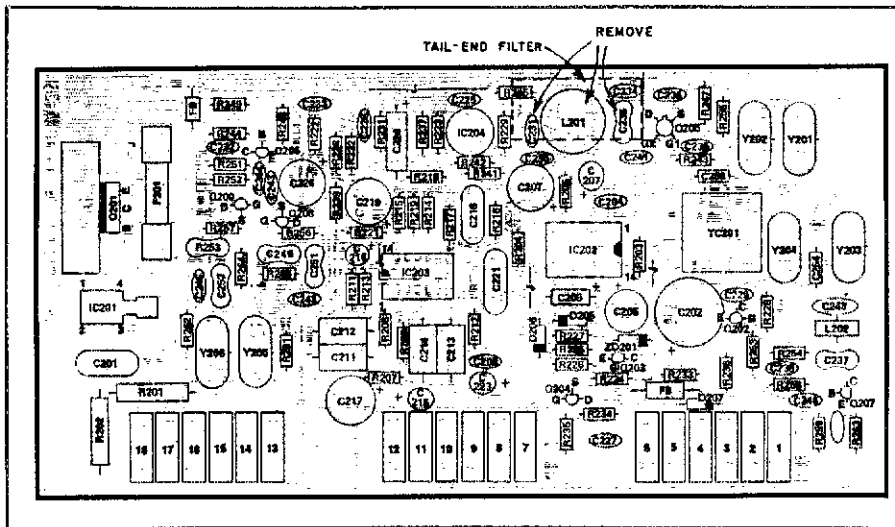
Component-side view of the HR-1680 audio/regulator board. The tail-end filter sits on top of this board.
